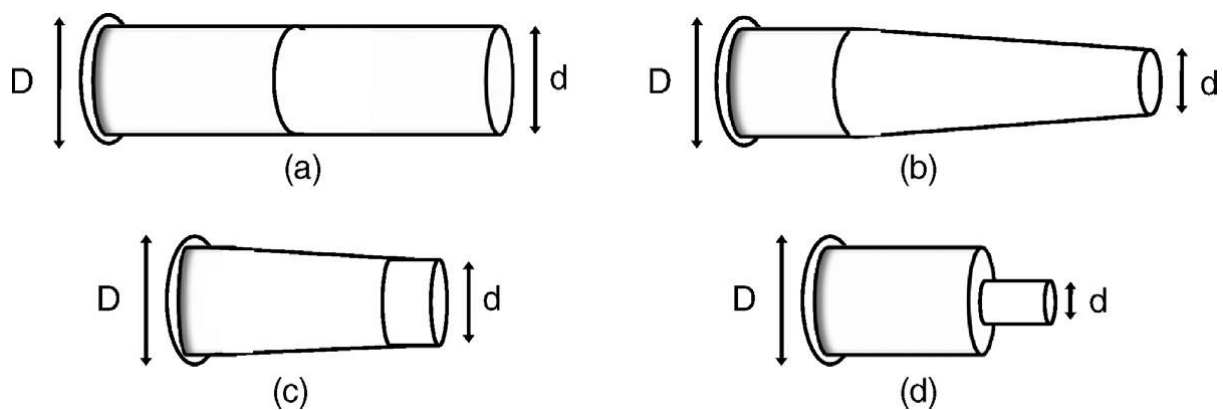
"Probe shapes: (a) uniform cylinder; (b) exponential taper; (c) linear taper or cone; (d) stepped" ^[49].
